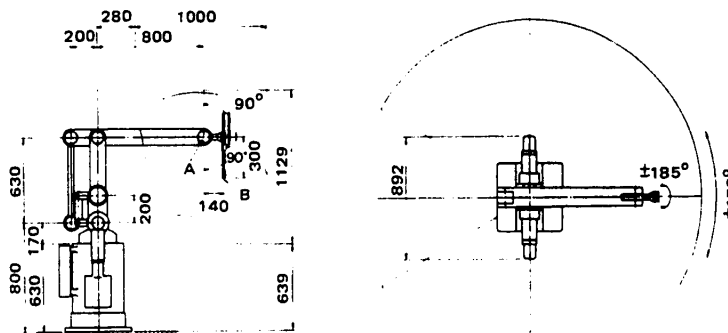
Working Range of the Arc Welding Robot (Unit: mm)
